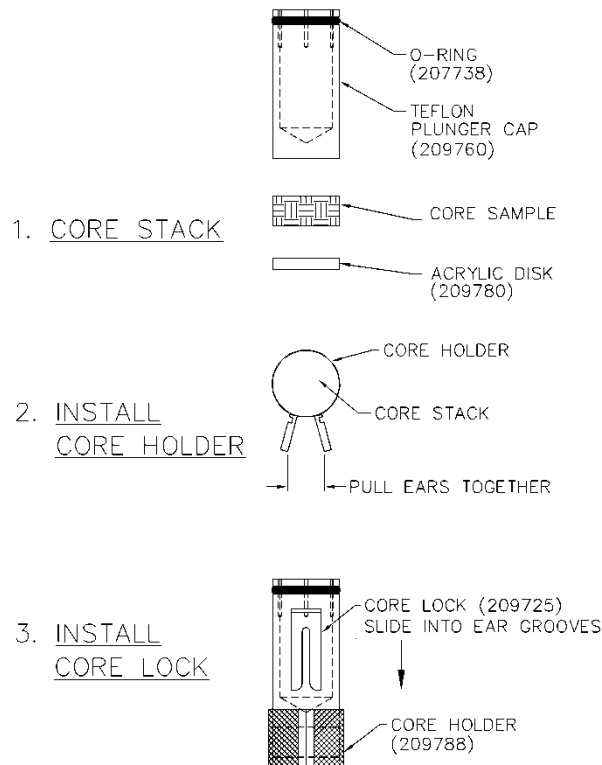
Step-by-step Assembly for Shale Core Plug
